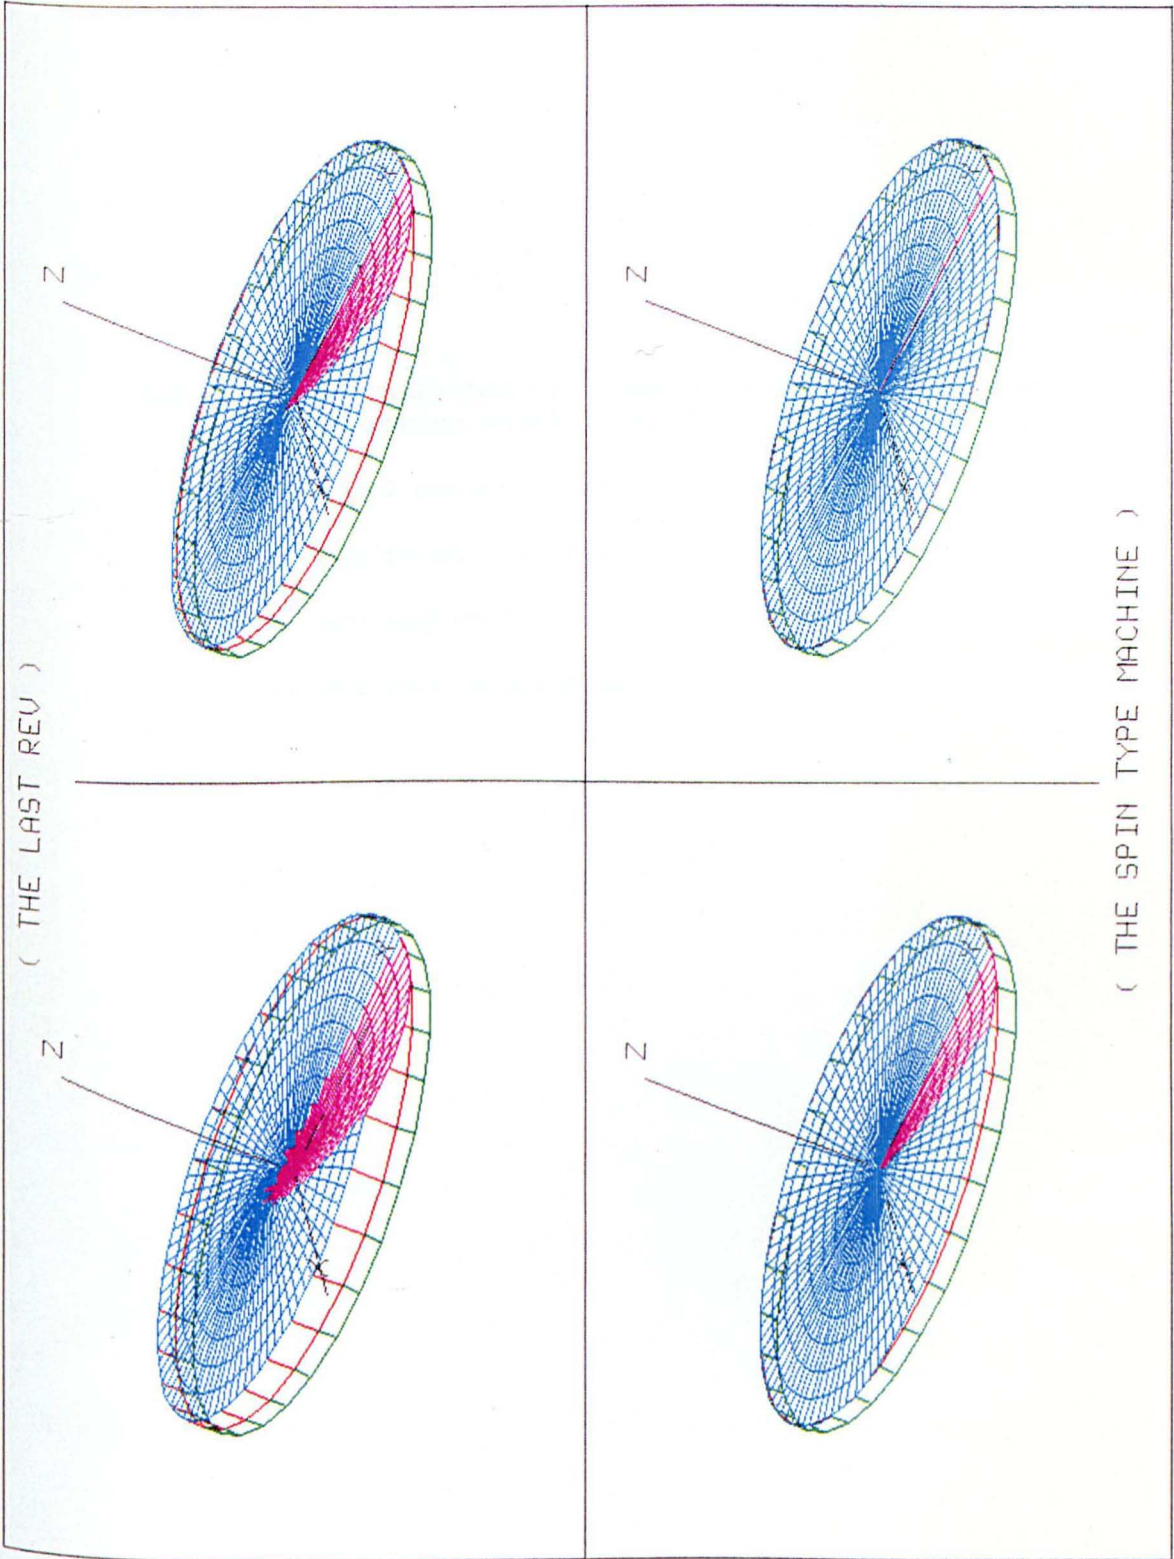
Illustration of a workpiece being deformed by an imaginary inclined tool
